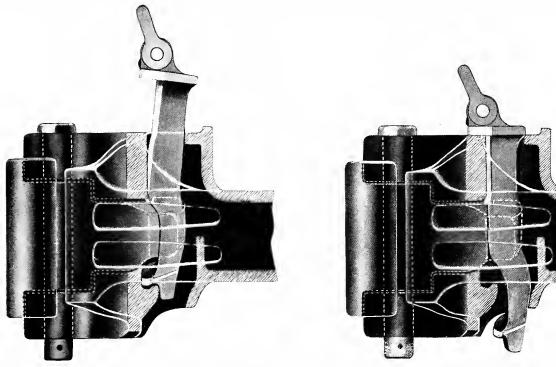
R. E. Janney Coupler in Lock Set Position.
